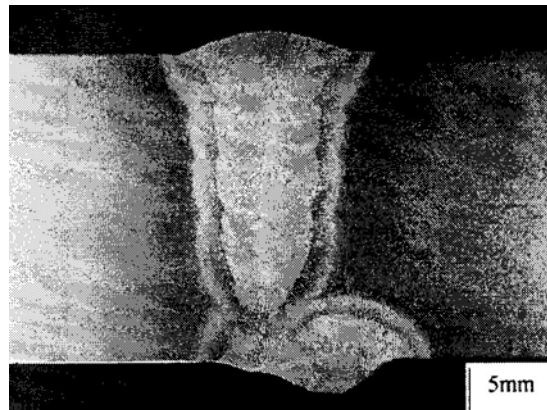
Typical All-External Mechanized Weld Macrosection
